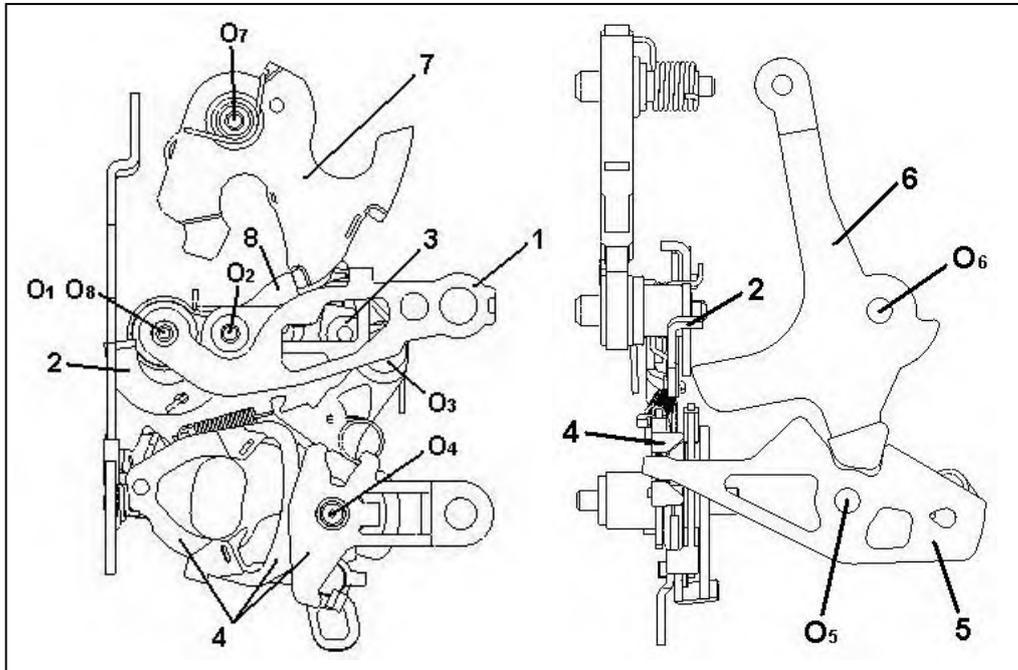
Catch release chain – side door latch (Ford-NGL2)
